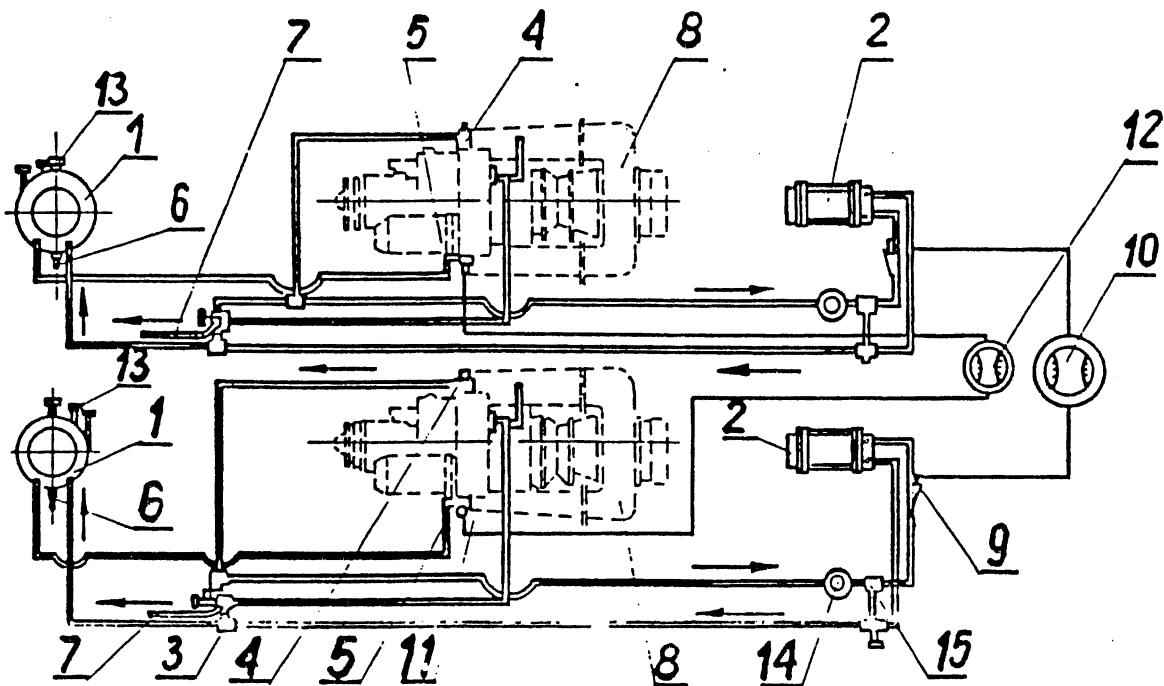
ENGINE LUBRICATION SYSTEM.
